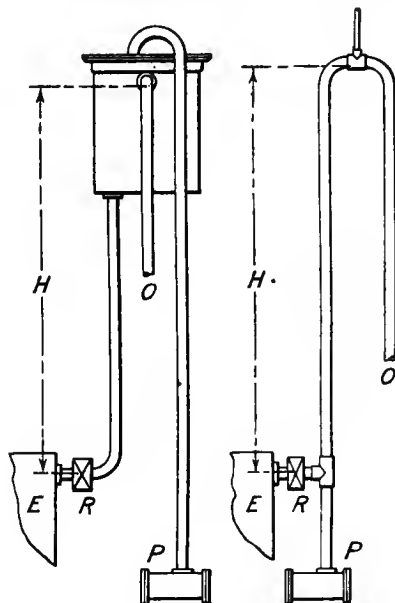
CONSTANT HEAD OIL FEEDS.
